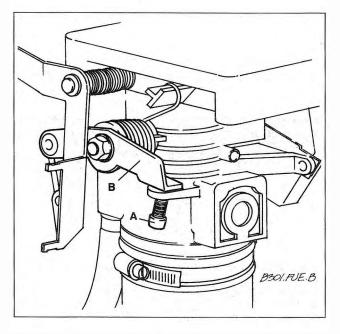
Throttle adjusting screw with tamper-proof cap (A) and throttle lever (B).
